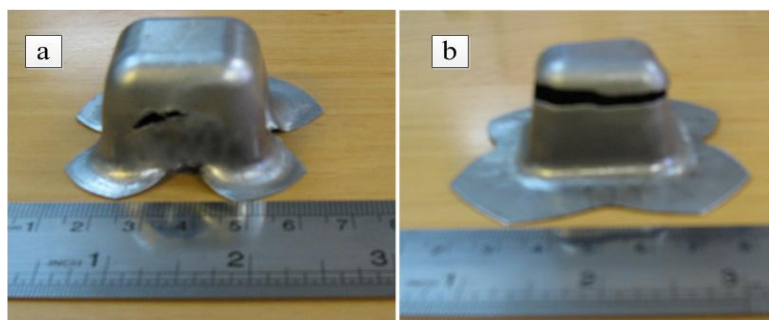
Failure in the parts; a) HDD and b) traditional deep drawing
